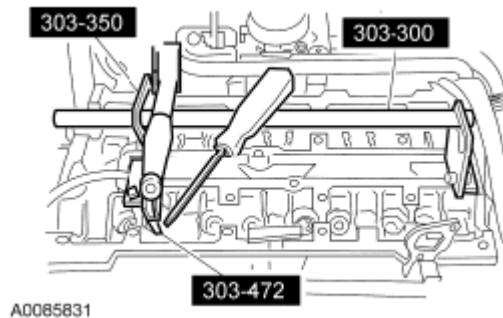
Identifying Valve Spring & Valve Spring Retainer Special Tools
